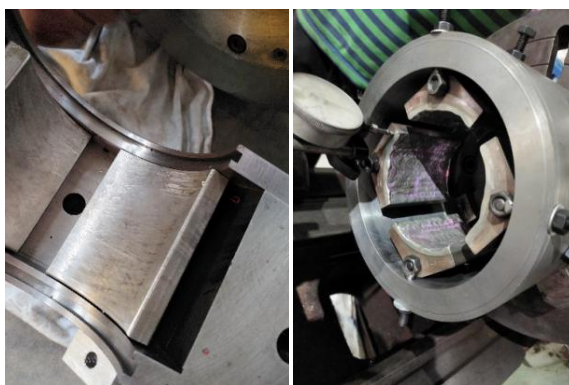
Overlay welding repair of the babbitt metal layer on the bearing seat
